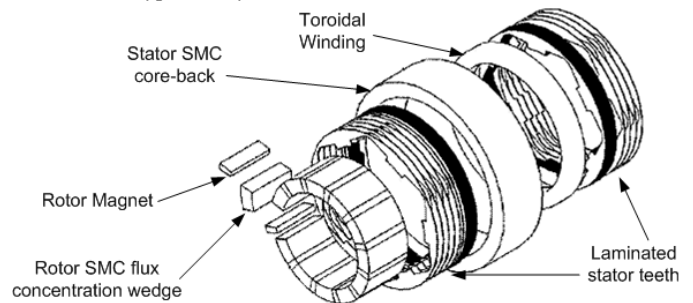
Hybrid SMC Laminate Machine Exploded View
